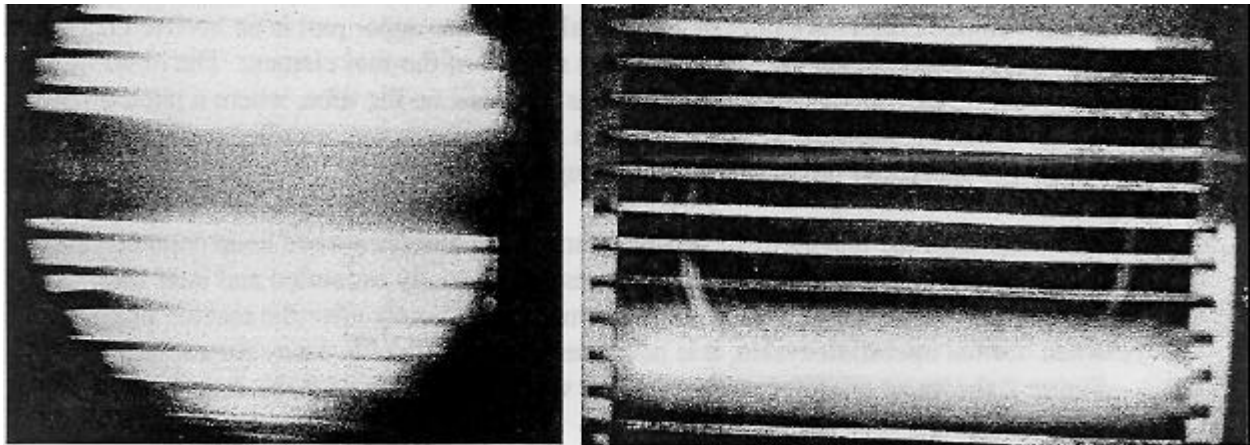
& 4. Backlighted and frontlighted photographs of the P-04 taken during visual inspection.
